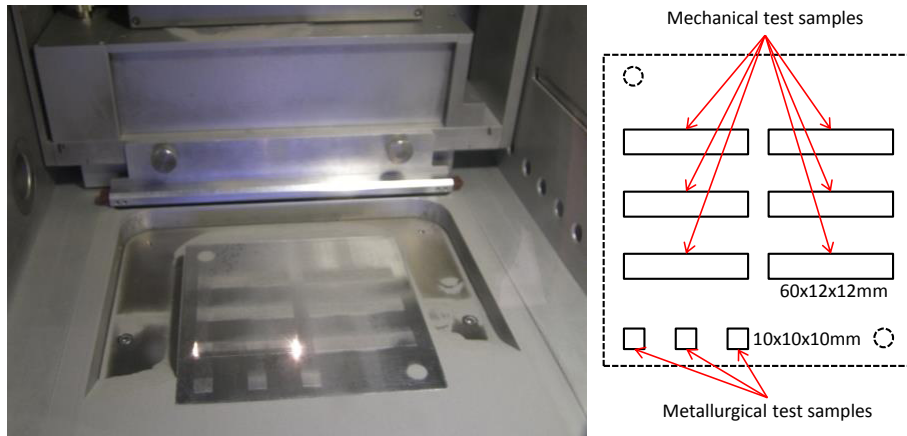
Left: picture showing manufacturing of tests pieces; Right: arrangement and dimensions of test pieces.
